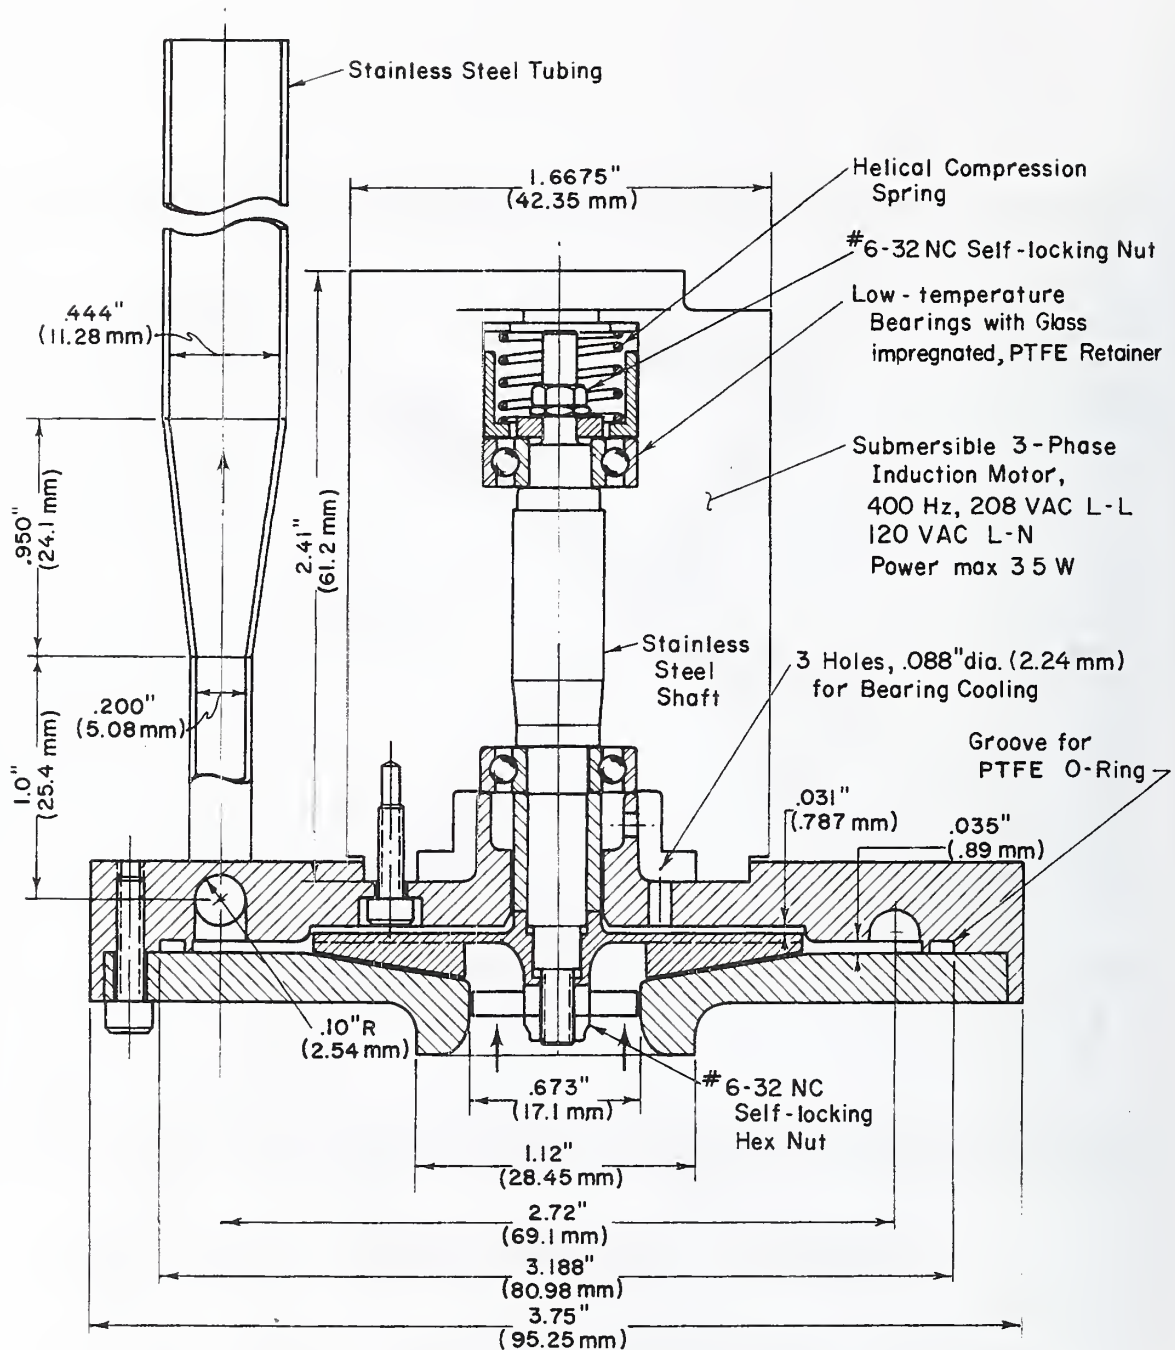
Assembly drawing of the helium pump and the original inlet geometry.
